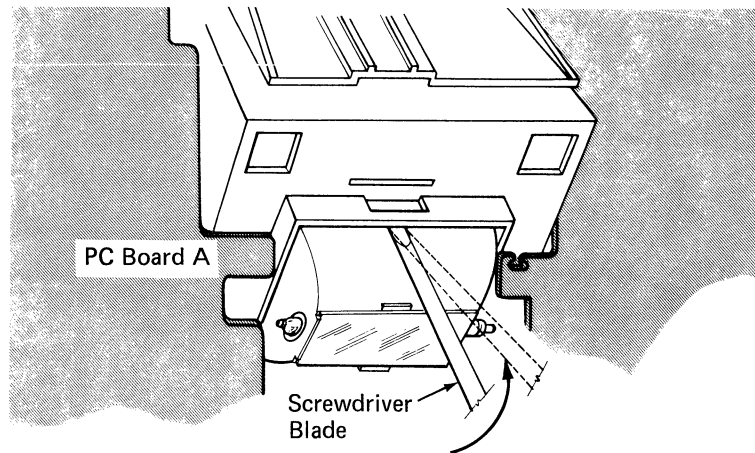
Removal of Flashtube/ Reflector Assembly
